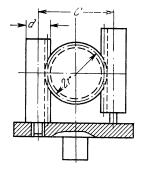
Diagram for determining the geometric dimensions of elements of the mechanism illustrated in Fig. 165
